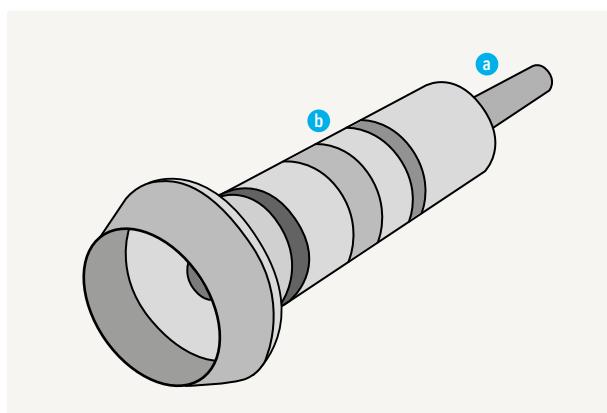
Direct rotor bearing, with rotor shaft (a) encased in ball bearing housing (b)
